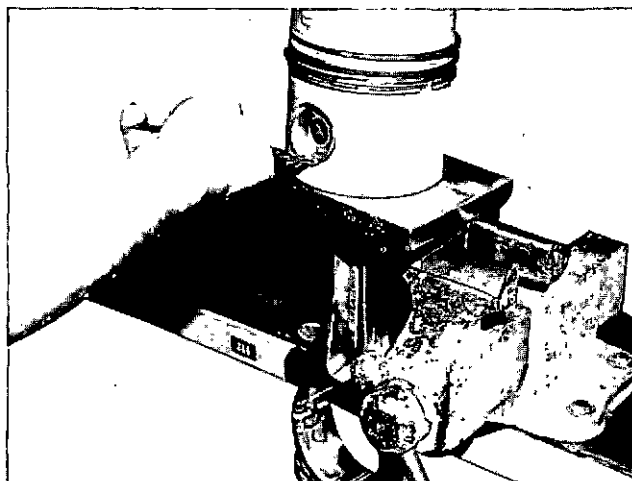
, V414117. Installing piston pin retainer ring
